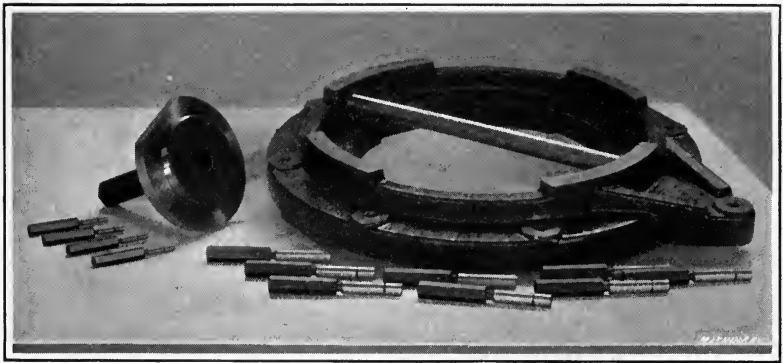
Hole Gages and Plugs used in testing the Locations of Holes in an Automobile Transmission Case
